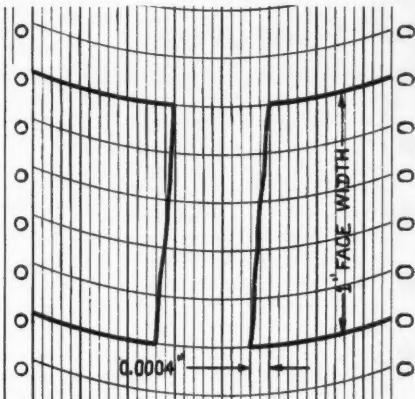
Chart of Adjacent Sides of a Right-Hand Helical Gear Tooth Showing that the Gear Measured Has 0.0004-Inch Displacement in Helix in the Face Width Measured, Indicating a Short Lead
